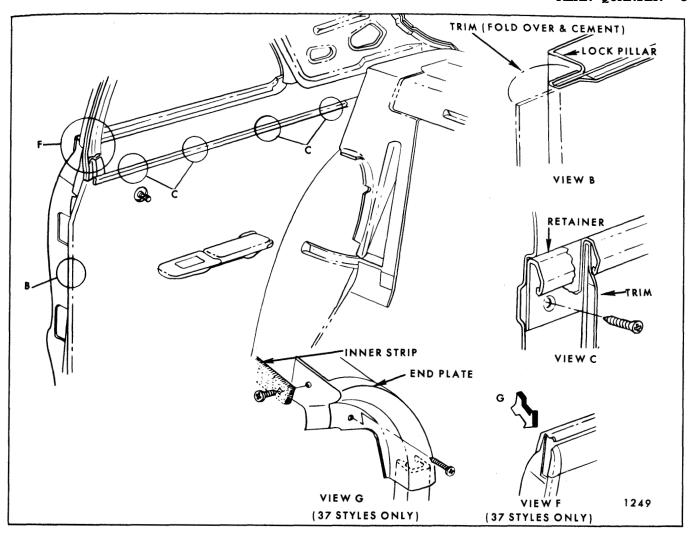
Rear Quarter Trim Assembly—"A & X" Two Door Styles Except Convertibles
